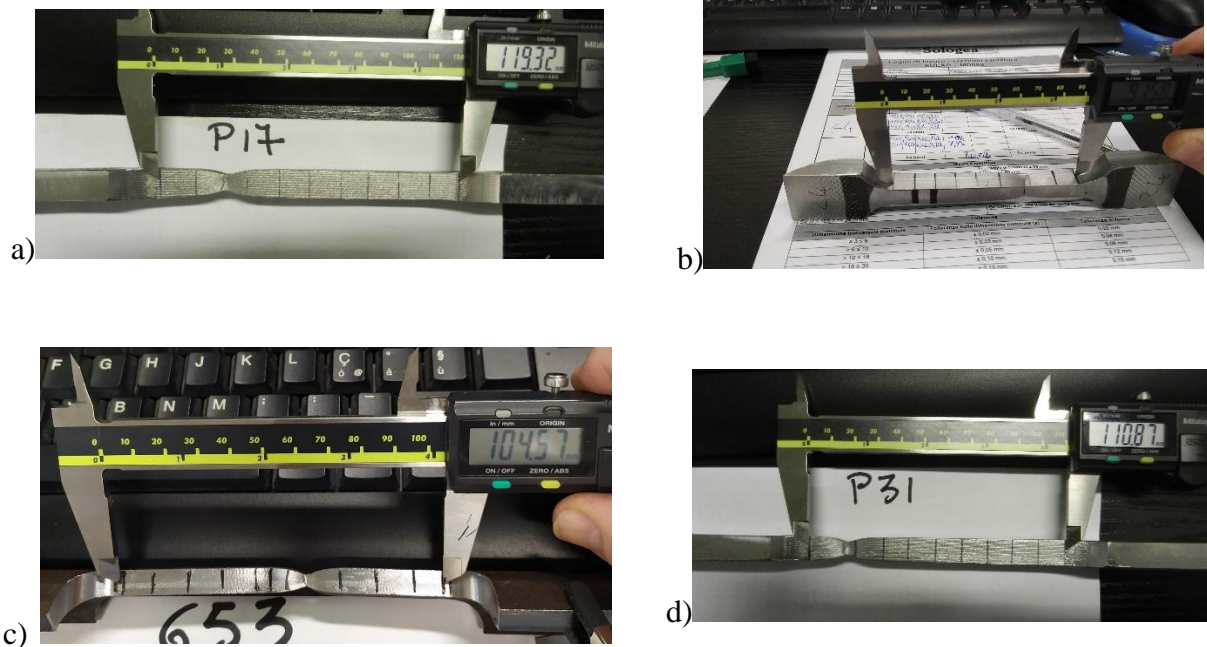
typical fracture of a) Flat b) Transversal c) Corner d) Weld coupons
